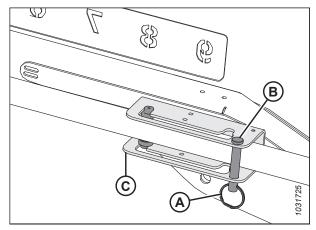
Outer Left Arm Cylinder – Forward Position
